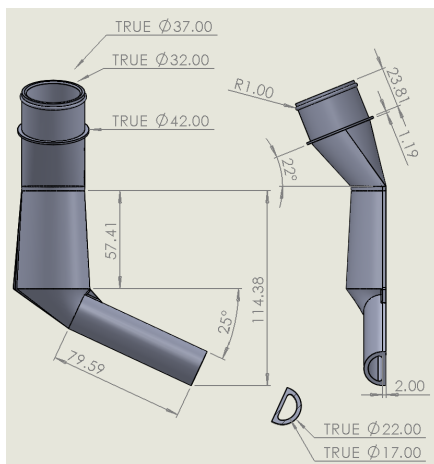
The SolidWorks design drawings for the 17 mm nozzle at angles 25°/155° with dimensions in mm.
